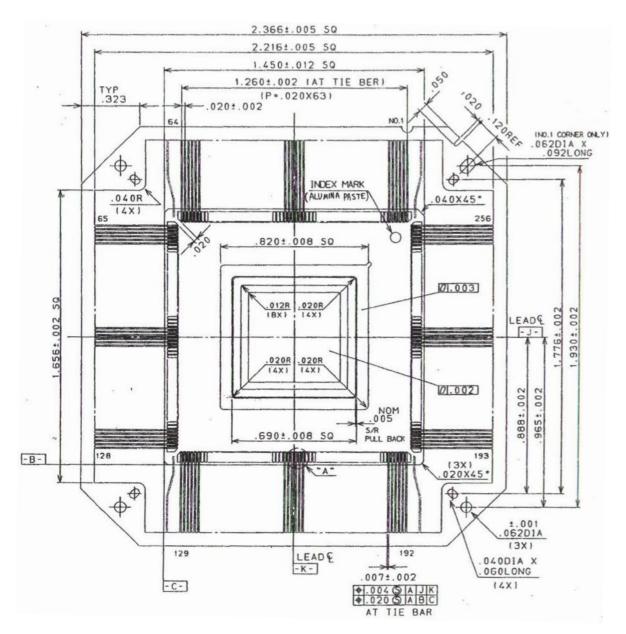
FM ETM CQFP package physical dimensions (Units:inches)
